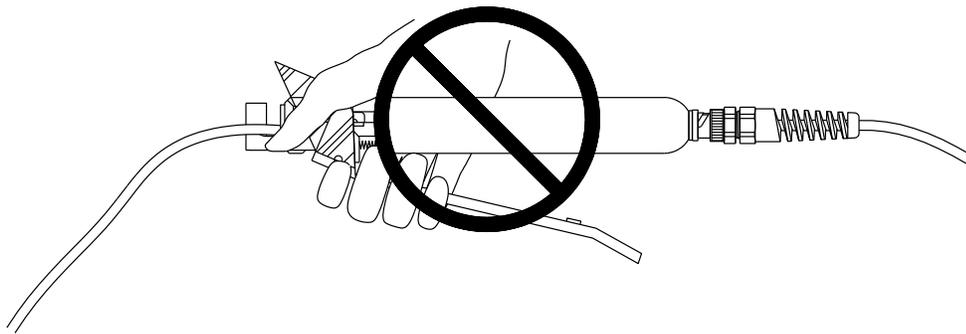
Incorrect Technique for Holding the Sealing Head
